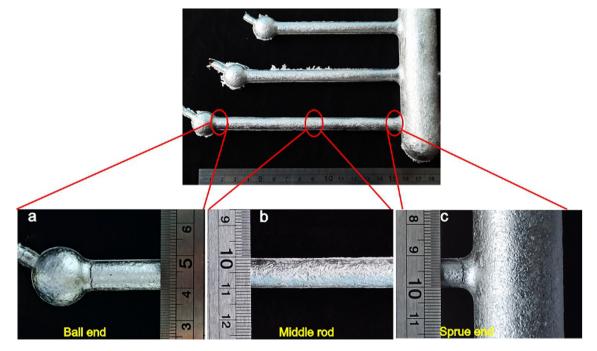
Location of the hot tearing on horizontal and vertical mold; (a) ball end, (b) middle rod, and (c) sprue end.
